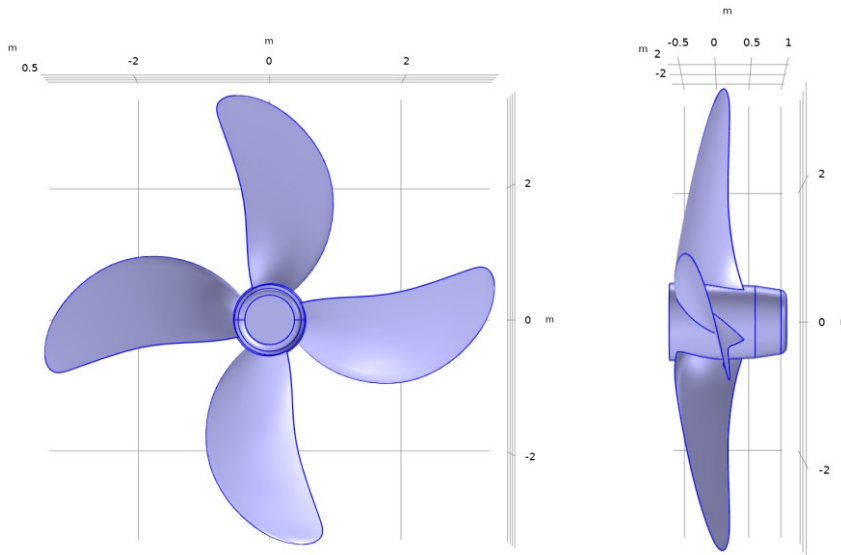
Geometrical model of the propeller for a 50000DWT oil tanker
